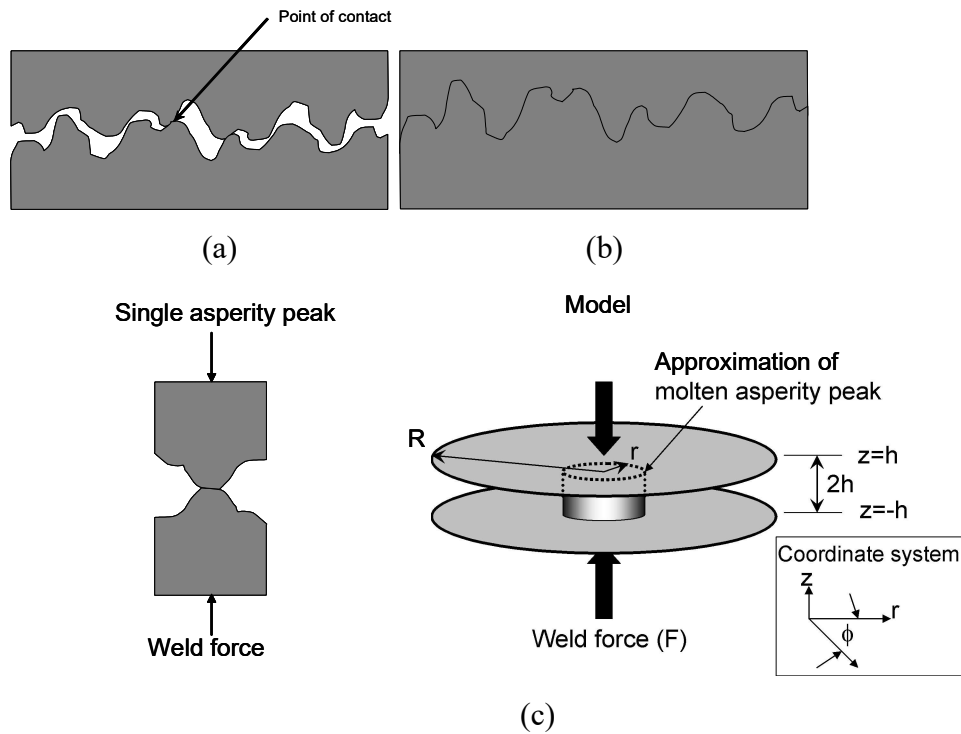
Cartoon of polymer interface with asperity peaks, (a) before welding (b) after welding and (c) idealized model
